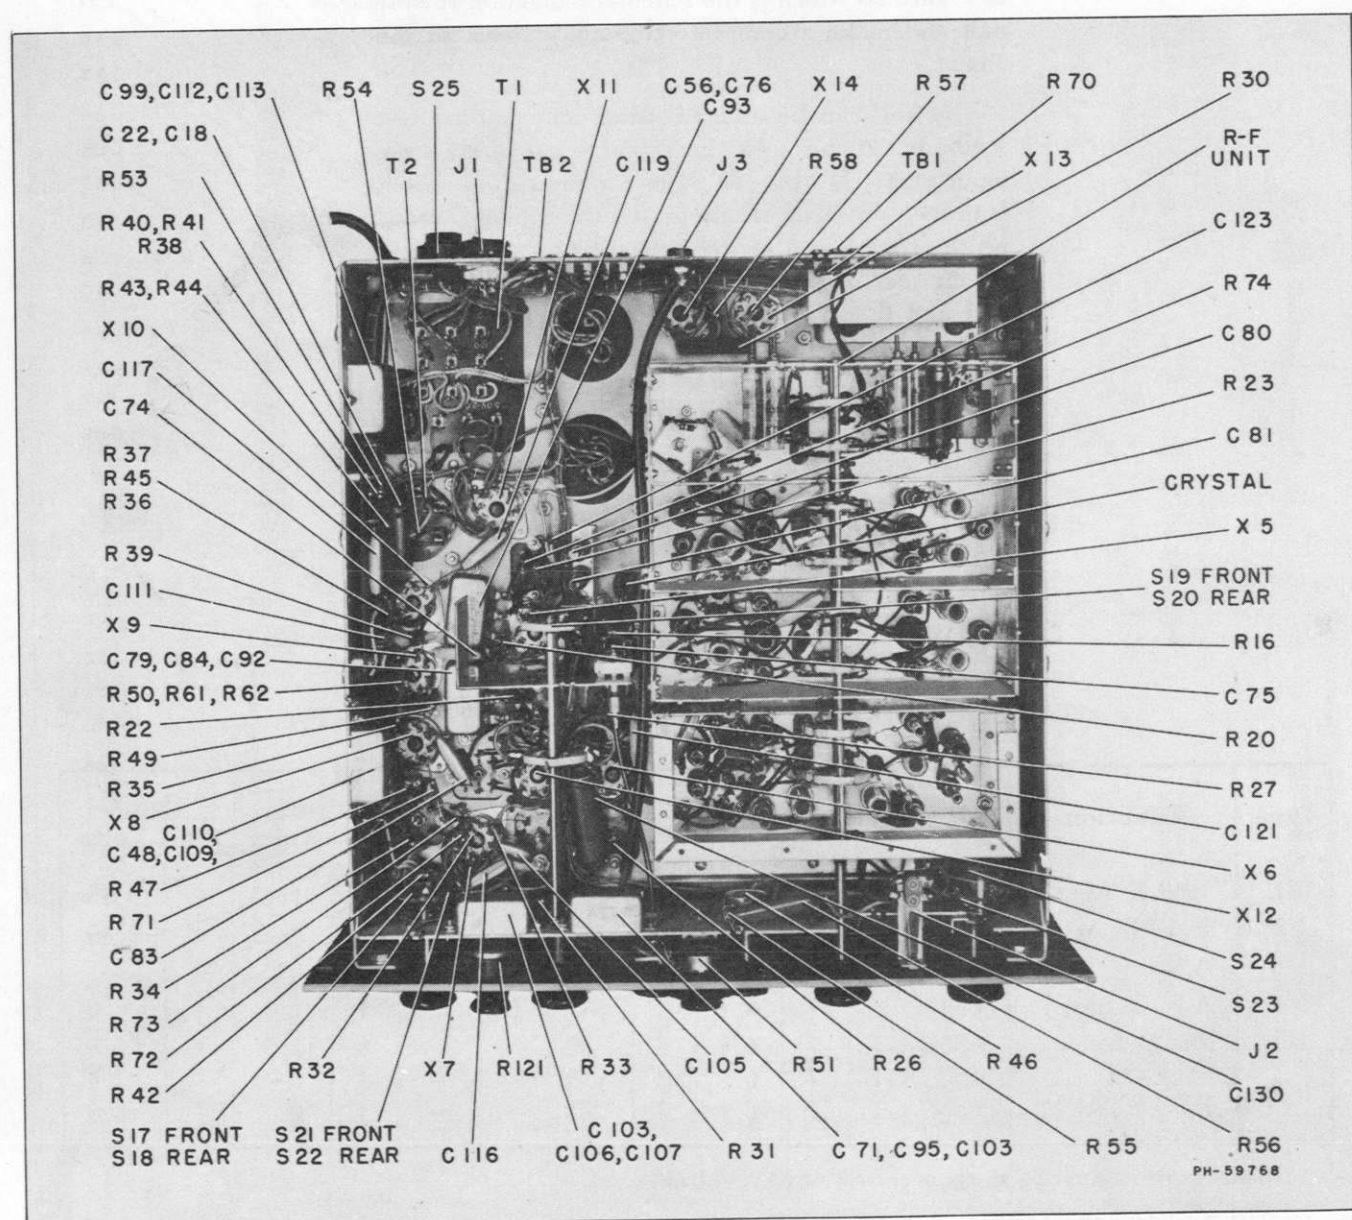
Radio Receiver, Navy Type CRV-46246-B—Chassis Bottom View
